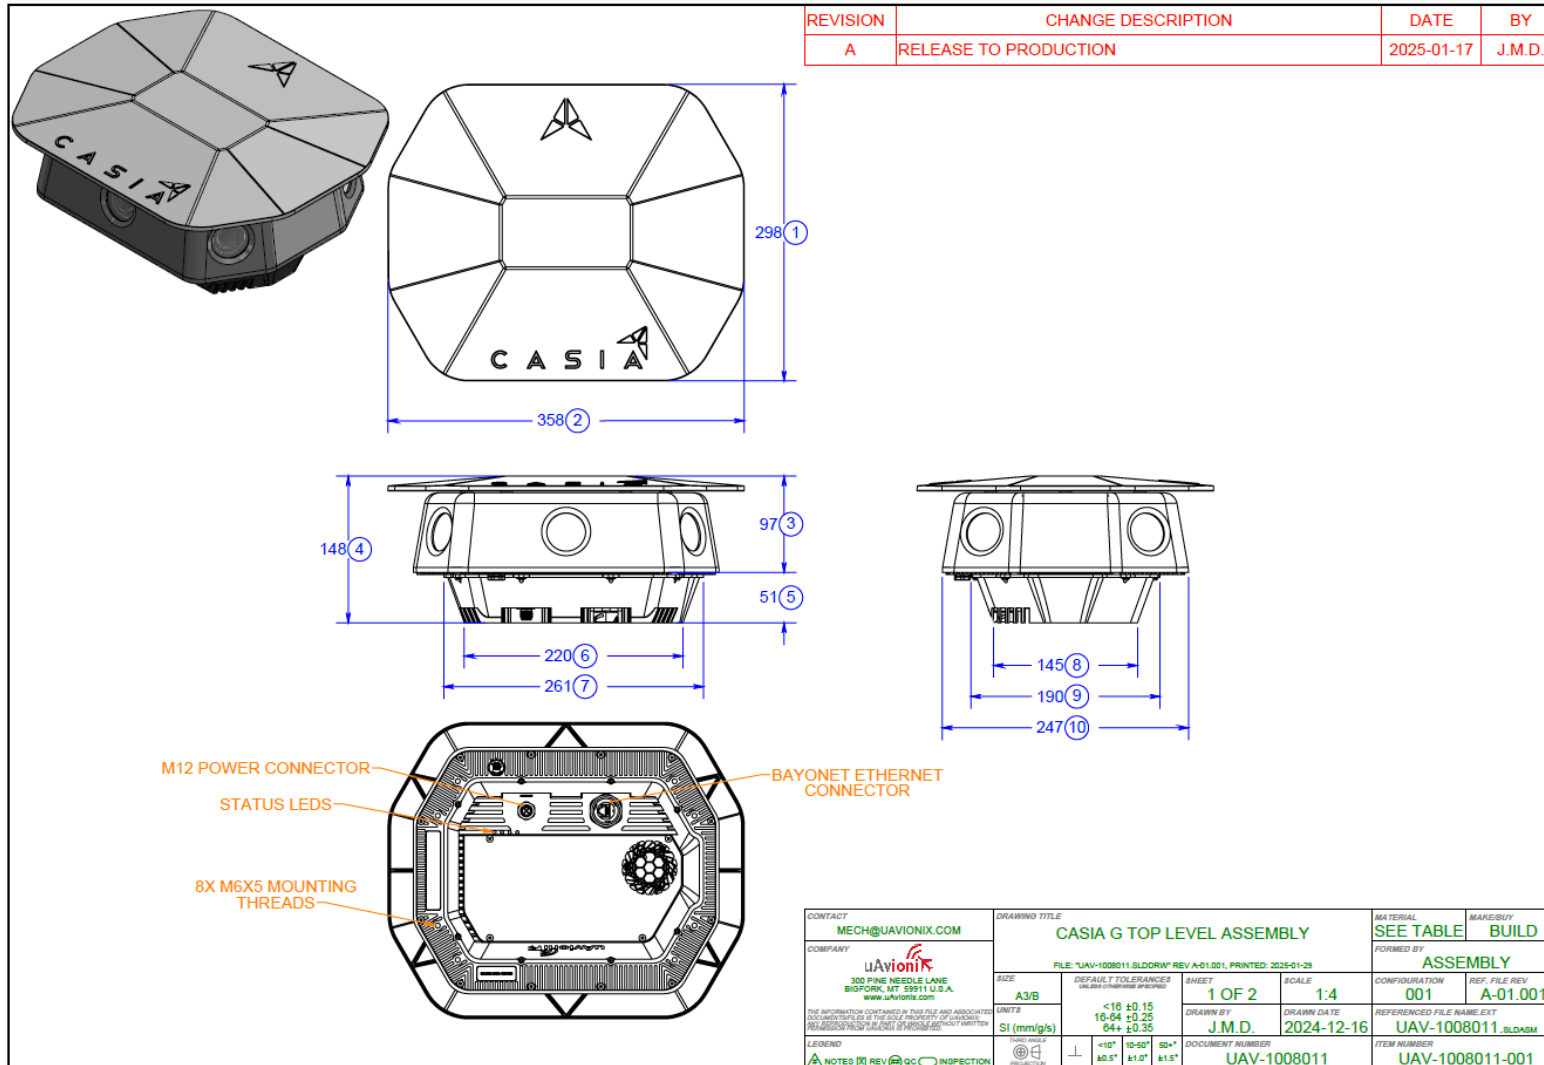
Casia G Top Level Assembly Mechanical Drawings
